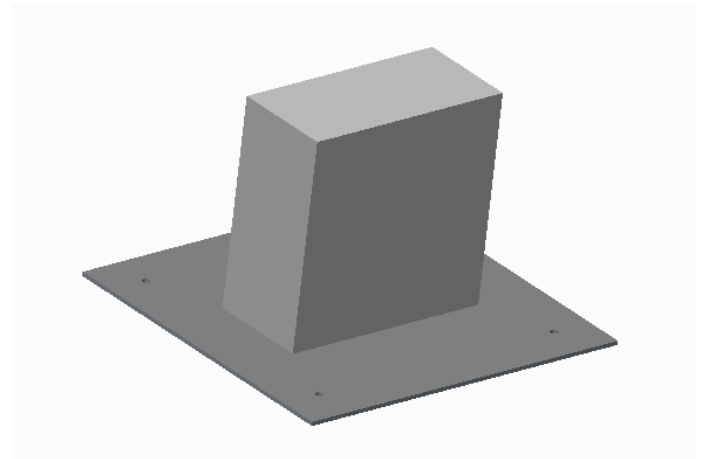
CAD MODEL OF IMPACT ATTENUATOR
